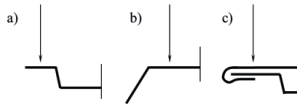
Measurement points on the parts and the assembly; a) flange of the inner reinforcement part, b) flush of the outer covering panel, c) flush of the assembly
